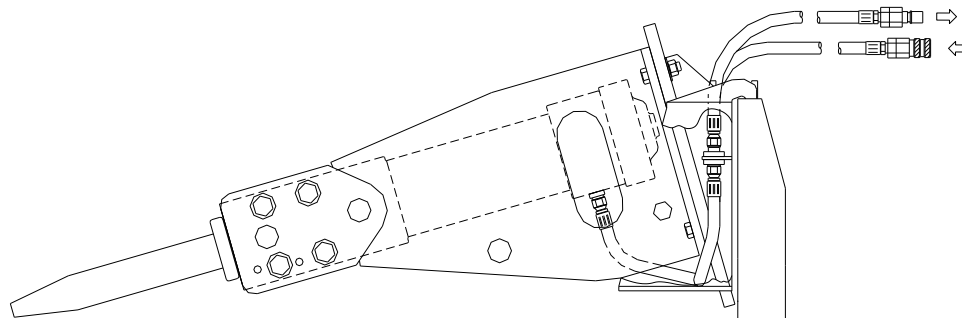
BR Housing Plates and SSU1 Mounting Bracket
